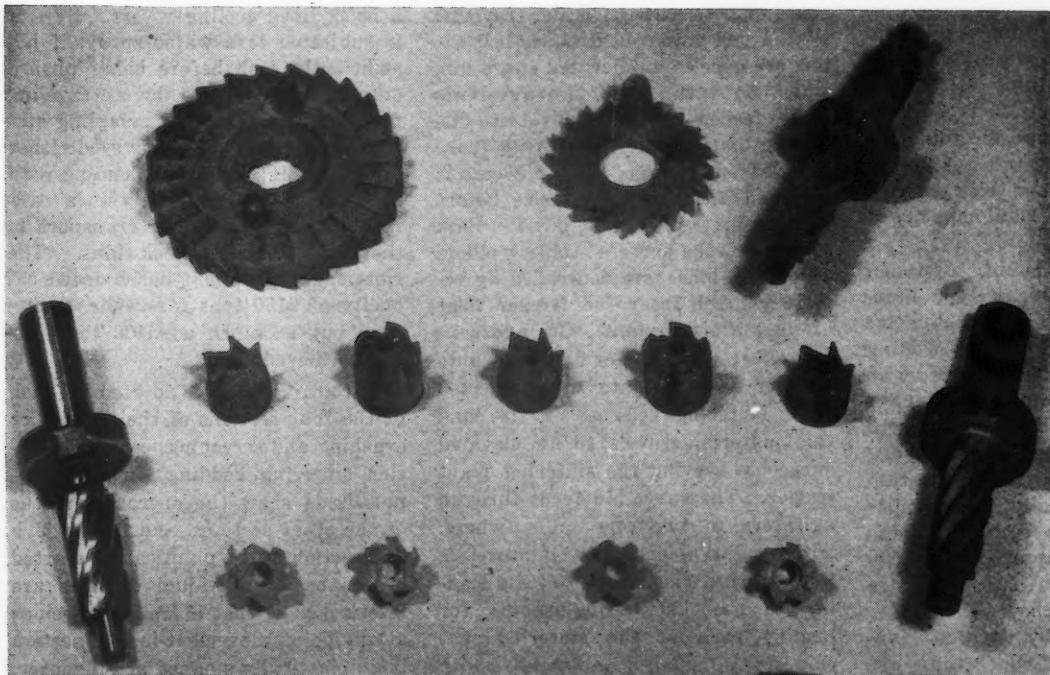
Wax patterns used for making cutting tools from high speed steel. At top right is a wax pattern for a small slab mill. The metal casting is shown underneath, and at the extreme left the finished ground tool. Patterns for spot facers are shown in the middle row and keyway cutters in the bottom row.
